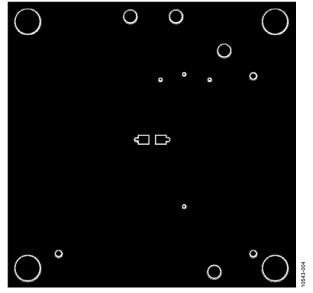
ADA4830-1BCP-EBZ Board Layout Pattern, Secondary Side
